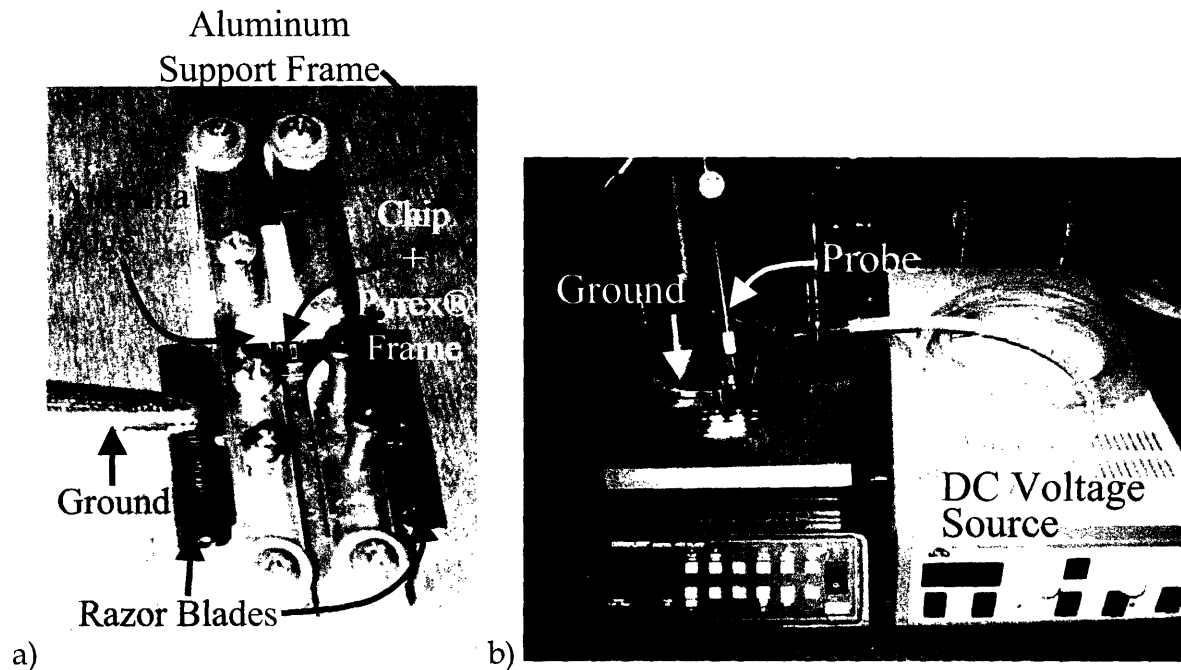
a) Picture of the anodic bonding fixture. An aluminum frame supports screws that hold razor blades (for contact) and an alumina edge (for alignment) in position. The Pyrex® frame with its two macroreservoirs covering the chip is visible in the middle of the fixture. The fixture is grounded through one of the razor blades. b) Picture of the experimental setup used for anodic bonding process. The fixture, with the chip and Pyrex® frame, is set on a hot plate at 300°C and grounded. A probe connected to the DC voltage source is lowered onto the Pyrex frame. The voltage (-1000 V) is applied after the fixture and chip have heated up to temperature.
